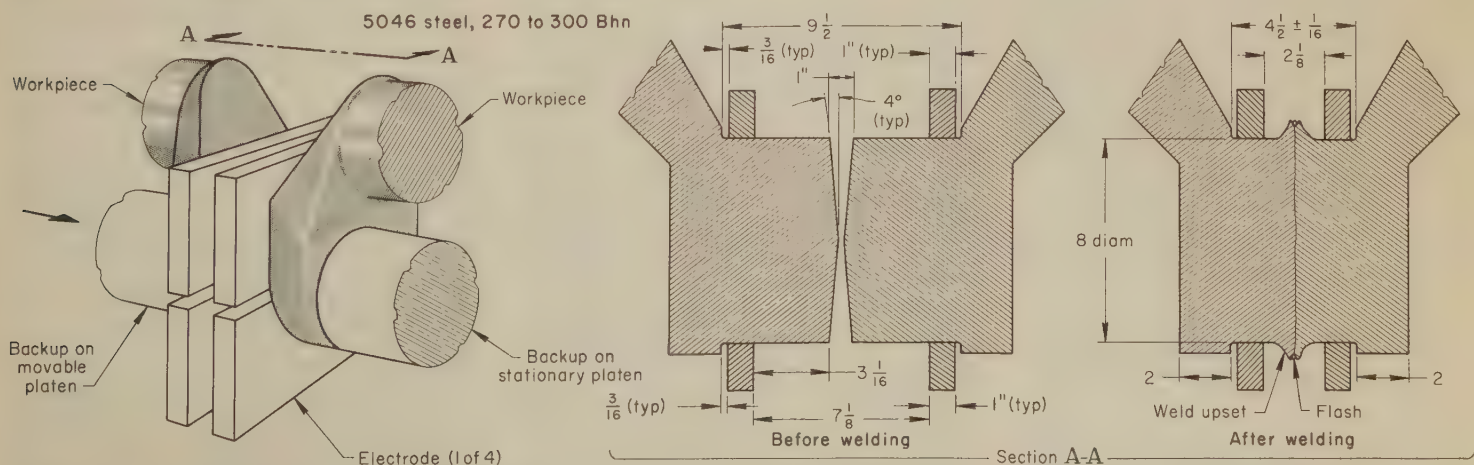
Setup and joint details for flash welding of two halves of a 14-ft-long crankshaft at an 8-in.-diam main bearing. Expulsion of flash from the thick sections was aided by a 4° conical relief machined on each surface to be welded. Total metal lost, exclusive of the tapered ends, was 4 in. (Example 435)
